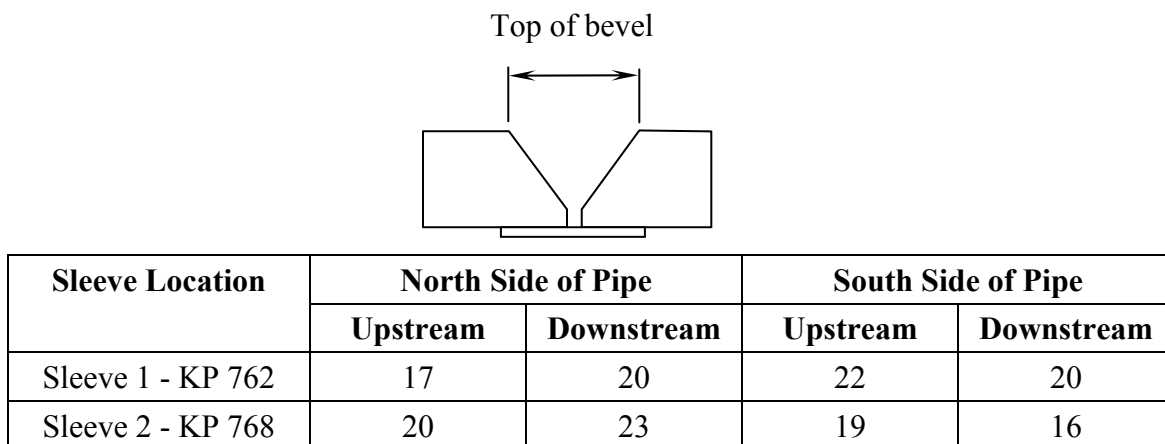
Dimensions on Sleeve Longitudinal Seams Prior to Welding [mm]
